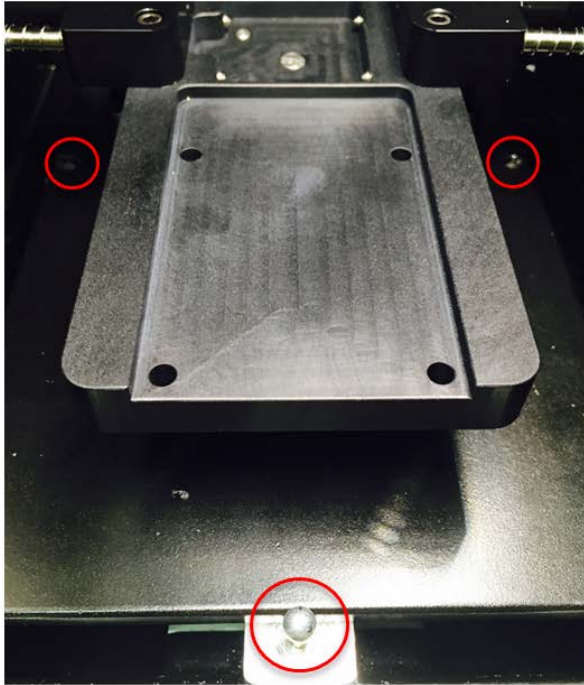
MS-2 Barcode Scanner Assembly
